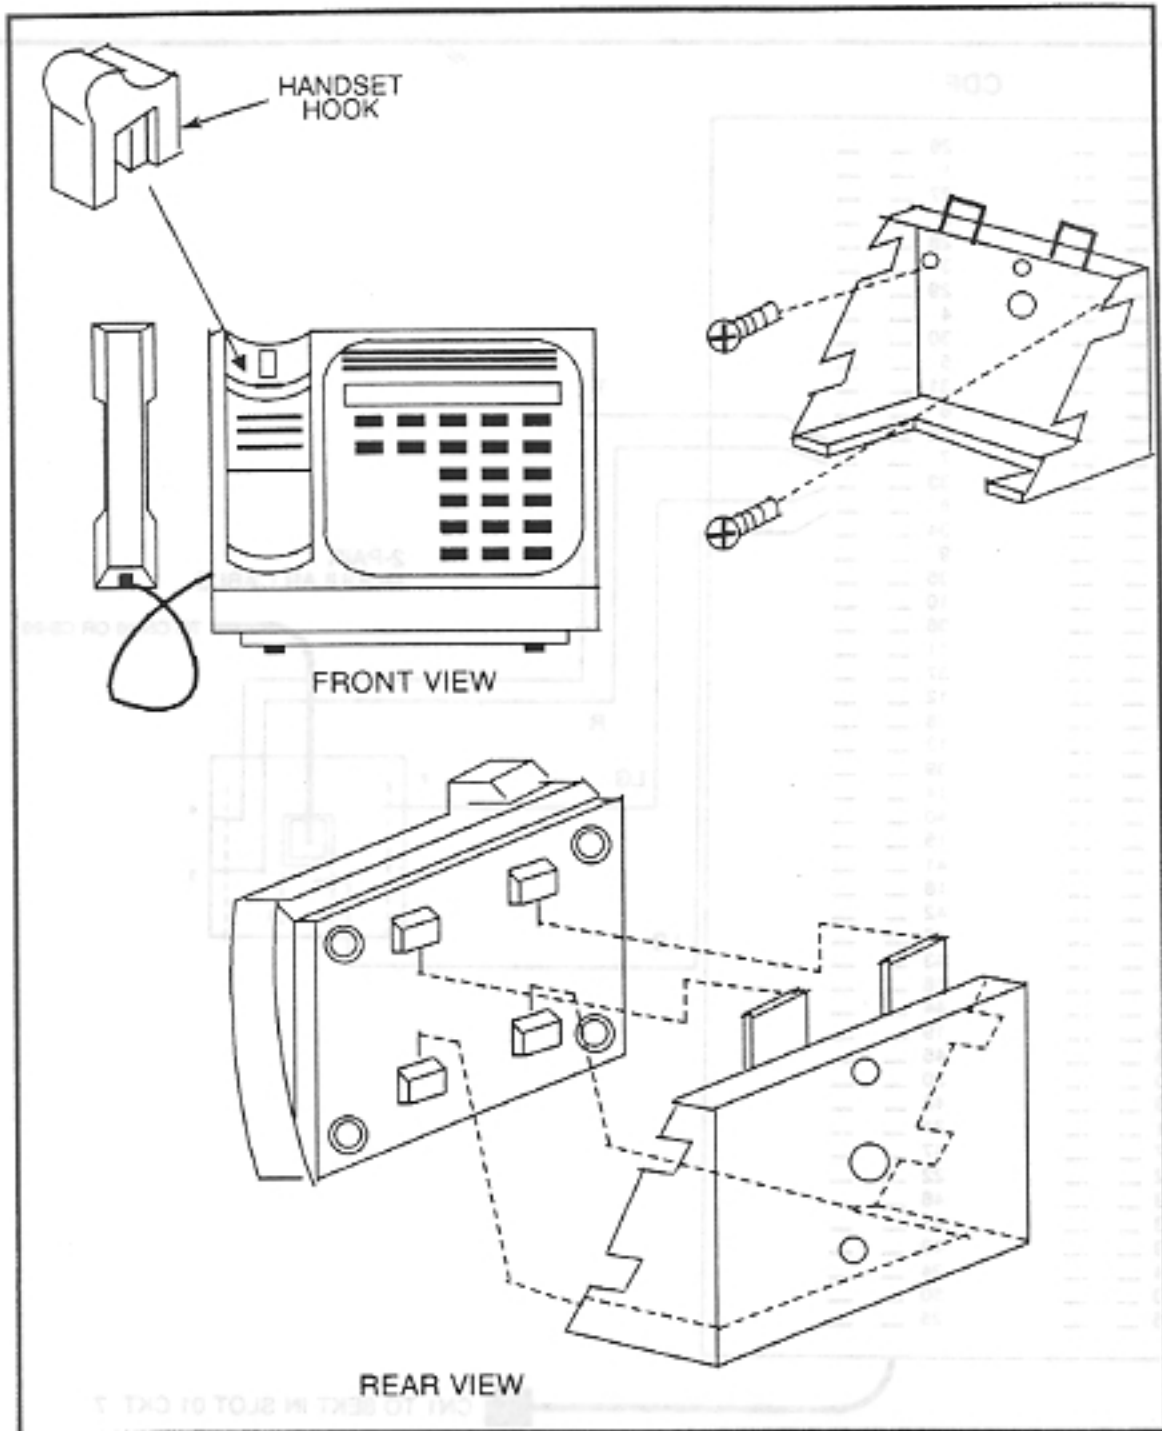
Proprietary EKT Telephone Wall Mounting
